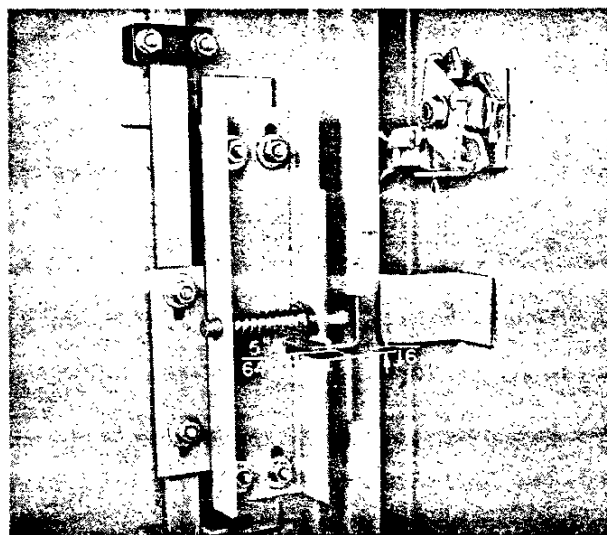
Close-up view of "door-forgetter" interlock adjustment
